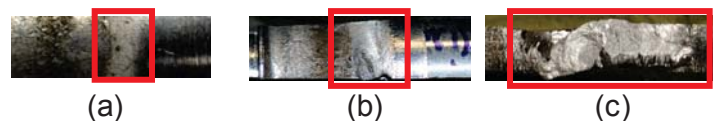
Illustration of a bad weld (a), a thin ring-shaped weld (b) and a large weld (c)
